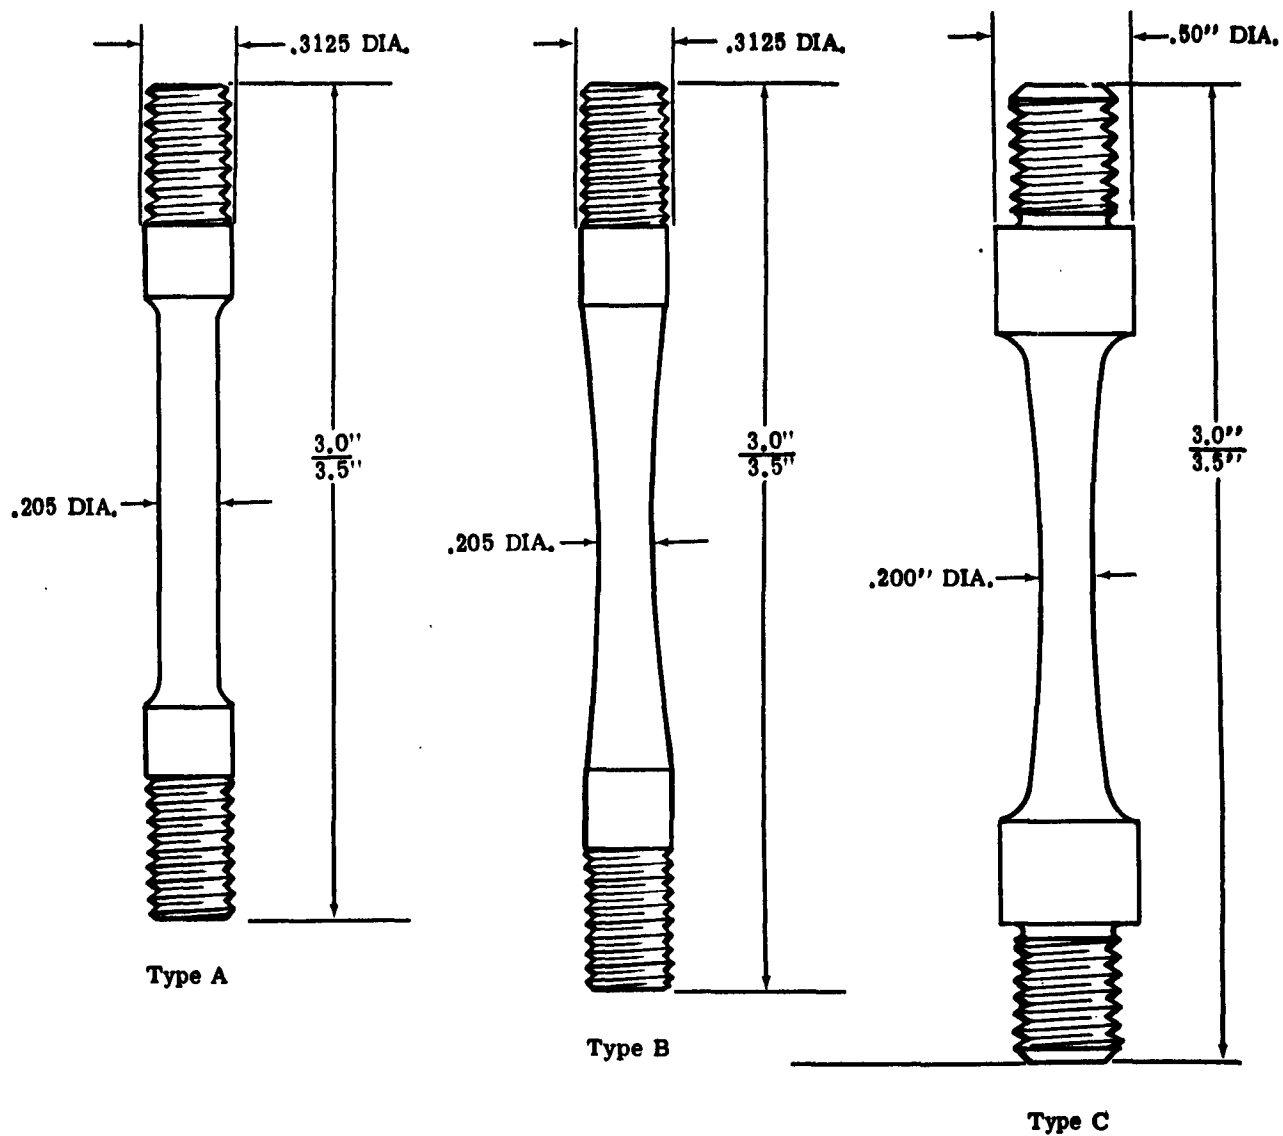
STRESS CORROSION SPECIMEN DESIGNS
